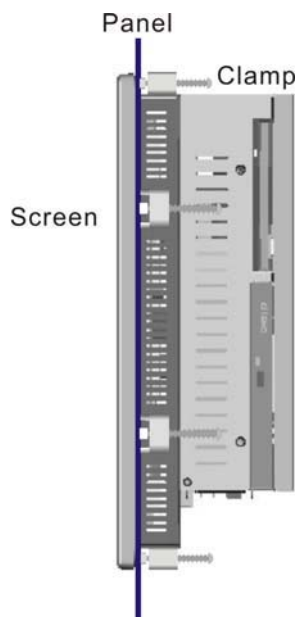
Tighten the Panel Mounting Clamp Screws
